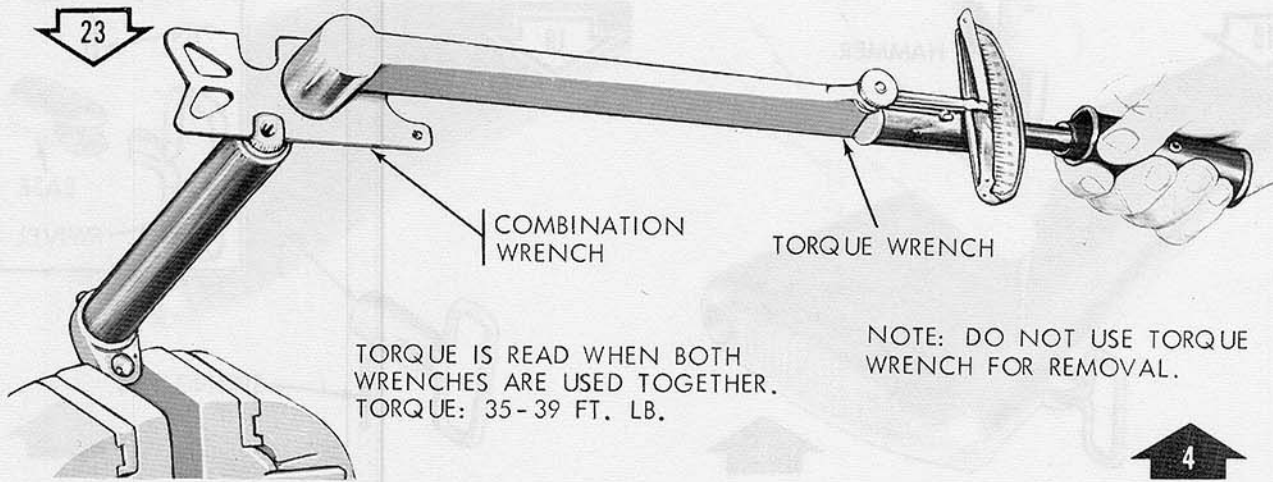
Disassembly/Assembly of Lower Receiver Group (Page 4 of 5)
